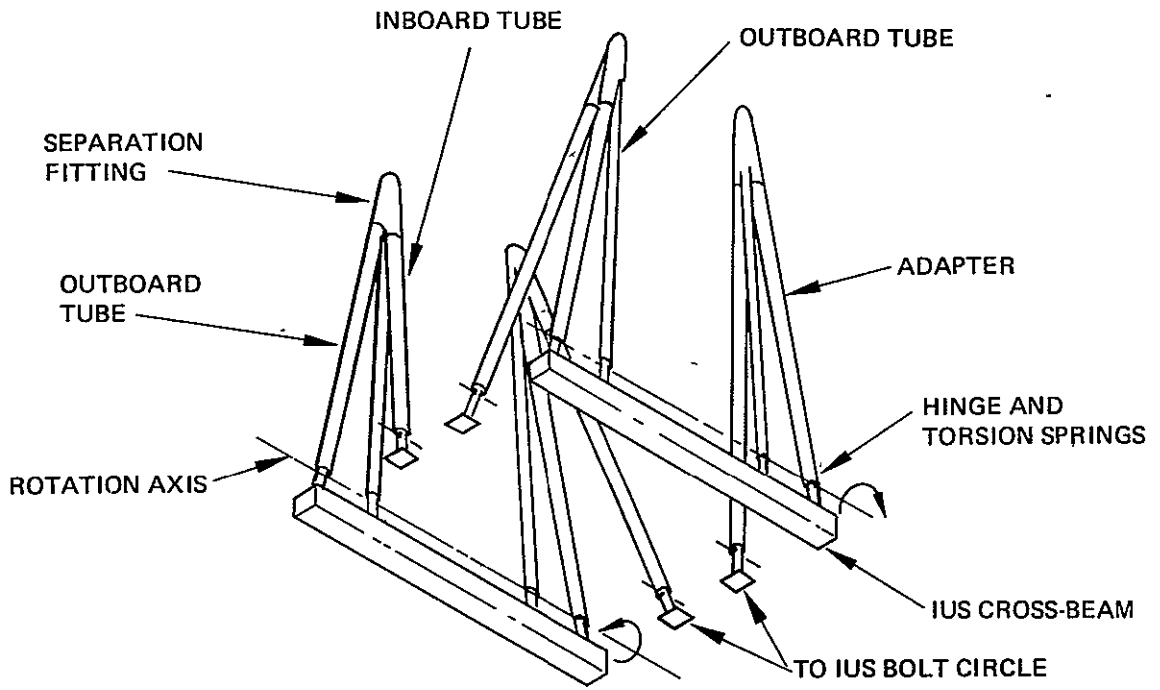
Adapter design for configurations 1A, 1AX, 2A, and 3A.
